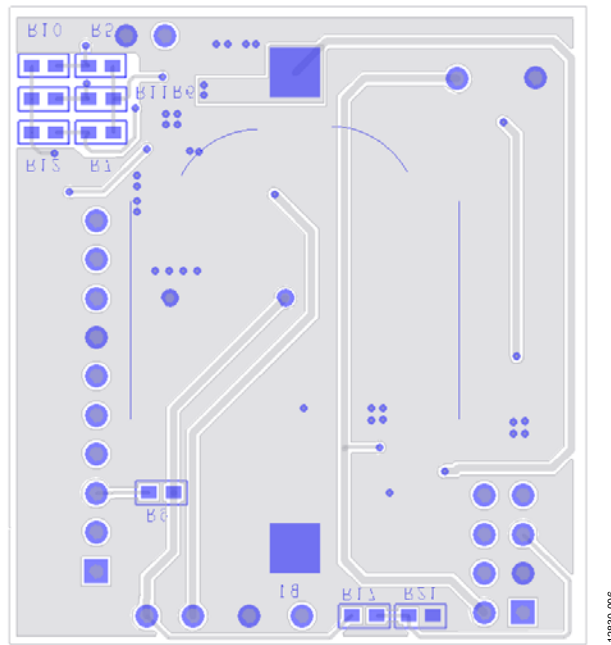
ADP5090-2-EVALZ Evaluation Board Bottom Assembly
